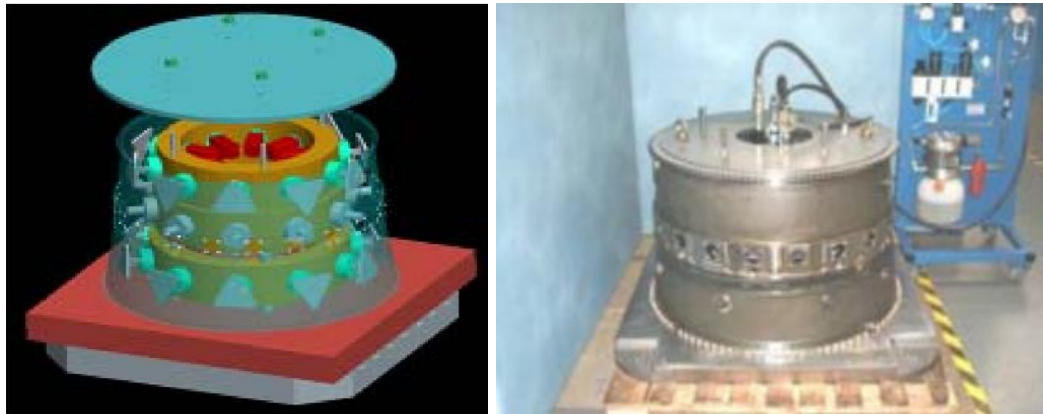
Combustion casing with hydraulically actuating pads fixture [35]
